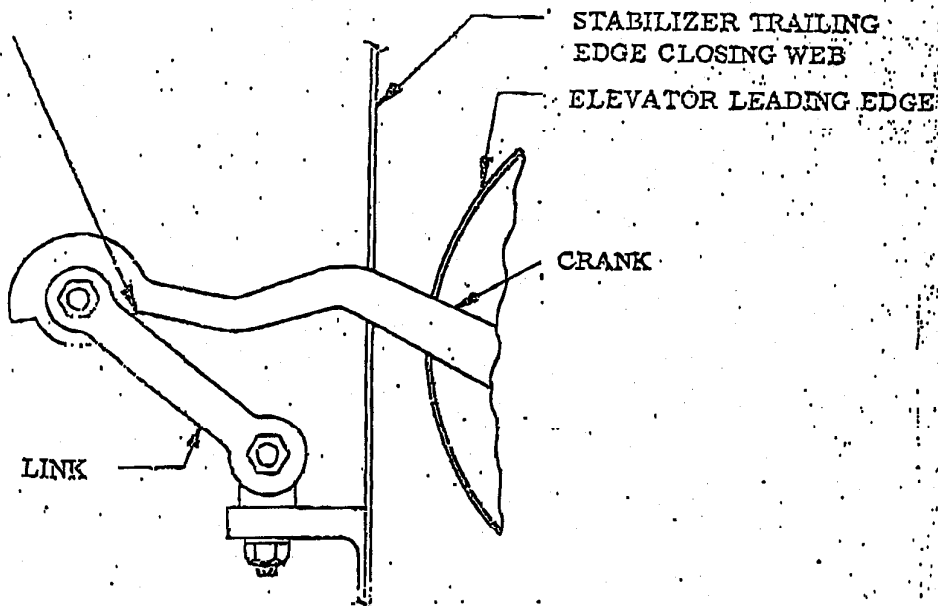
GEARED TAB INBOARD DRIVE LINKAGE
